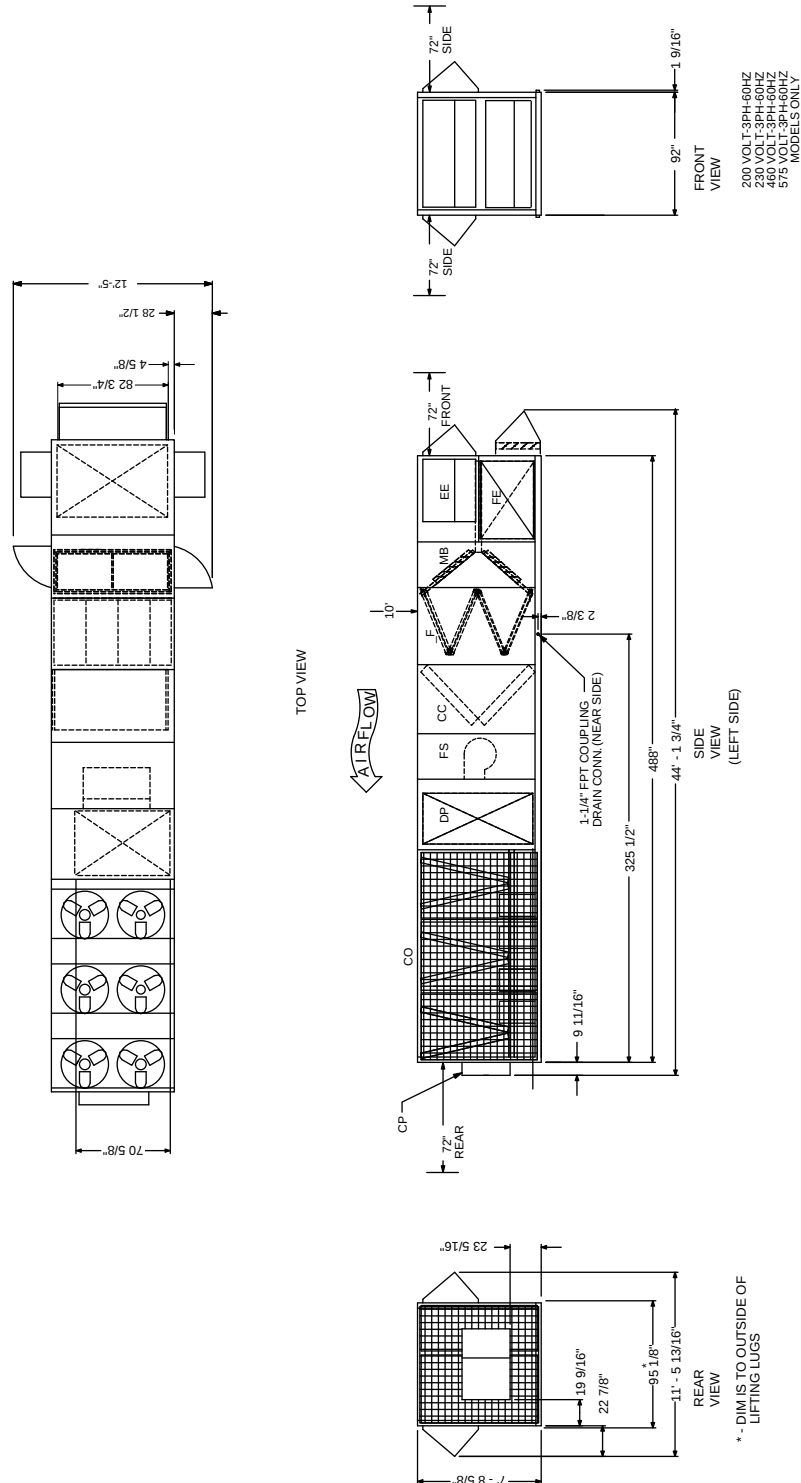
GENERAL ARRANGEMENT DRAWING
